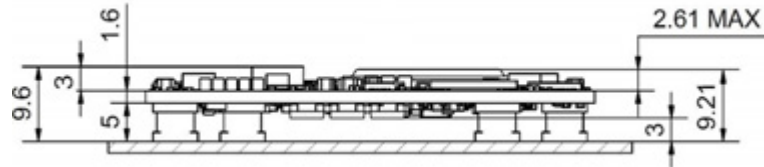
TQMLS1046A / TQMLS1088A dimensions, side view
